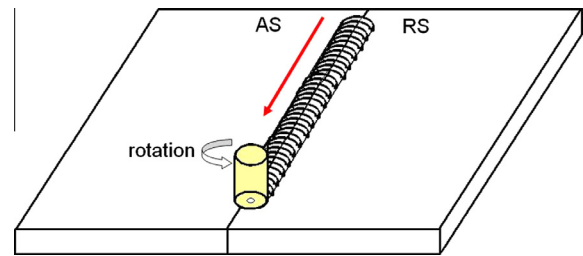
Schematic illustration of friction stir butt-welding.
